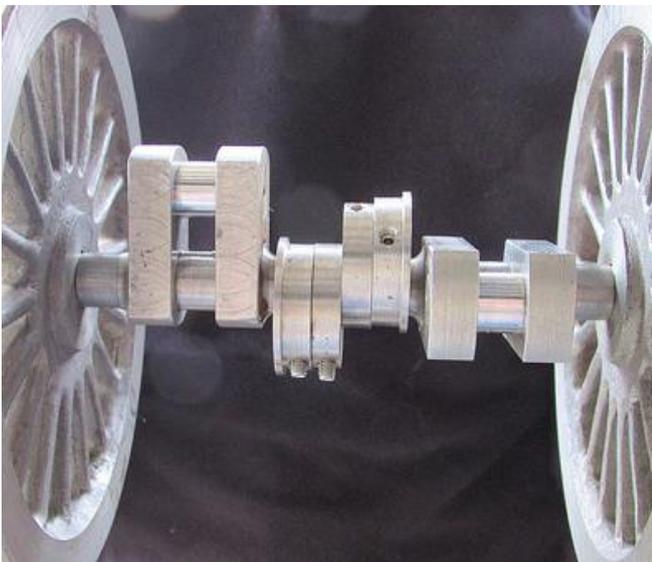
Part-assembled driving wheelset for John Hawley's 5" gauge 'Lion'.
